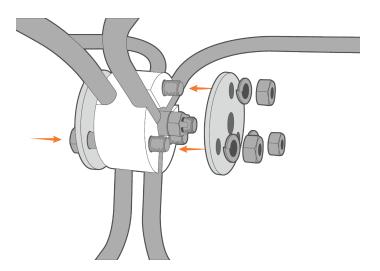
Use the end plates to cover the bracket mount openings for the cage and buoy frame.
